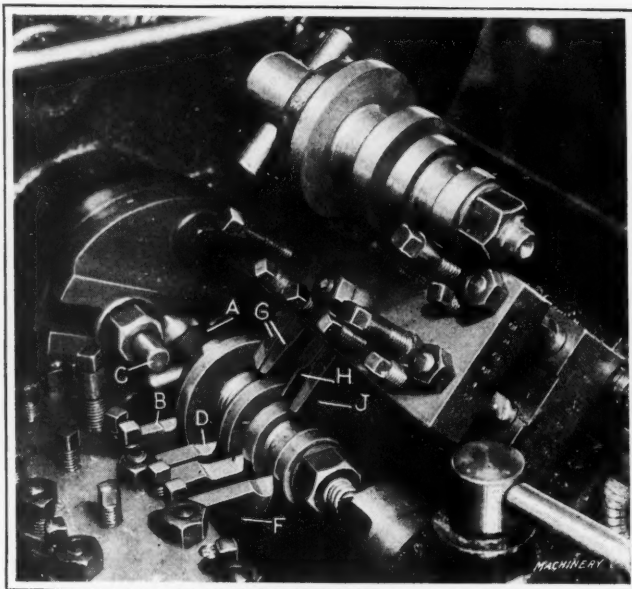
Tooling Set-up of Automatic Lathe used in machining Cluster Gears
